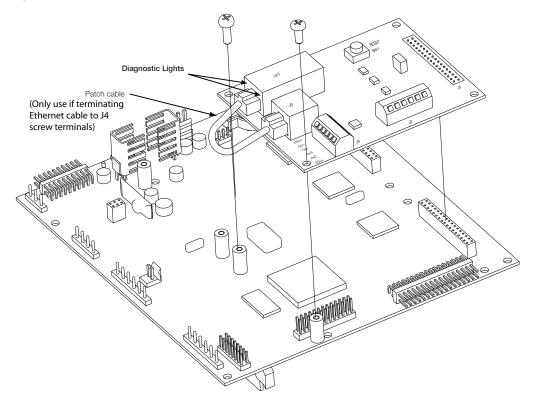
Ethernet Card Installation onto 920 CPU Board
